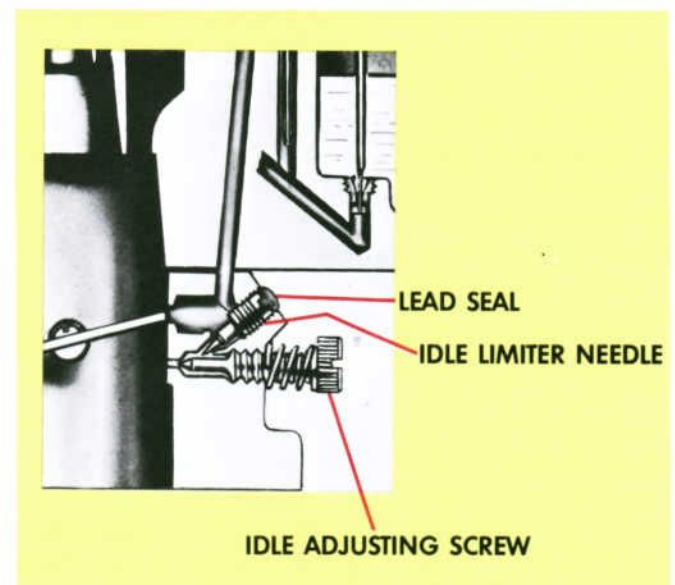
IDLE LIMITER, SEAL AND ADJUSTING SCREW (CARTER 1-V SHOWN)
